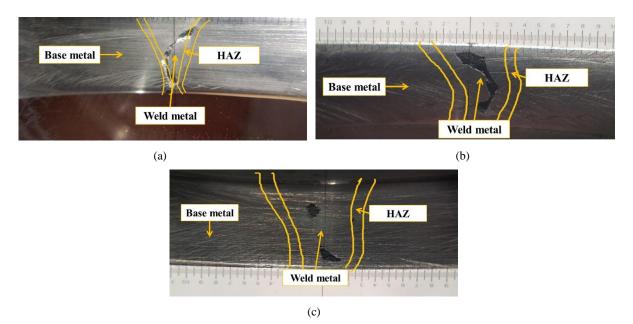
Macro photo of spiral welding movement results at the welding current of (a) 60 A, (b) 80 A, and (c) 100 A.
